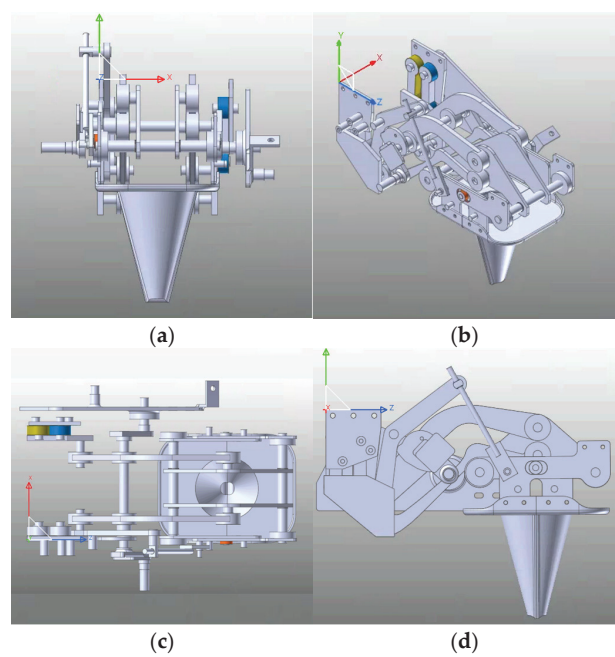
Three-dimensional model of cam-type transplanting device: (a) front view; (b) isometric view; (c) top view; (d) side view.
